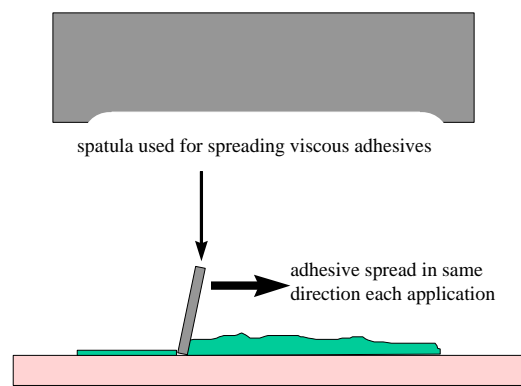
Bulk specimen manufacture technique for a highly viscous adhesive.
